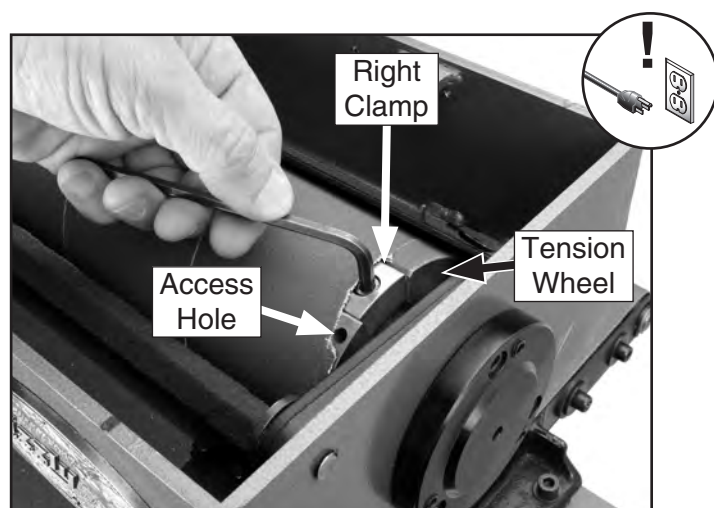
Example of loosening cap screw on right spring-loaded clamp (dust hood removed for clarity).
